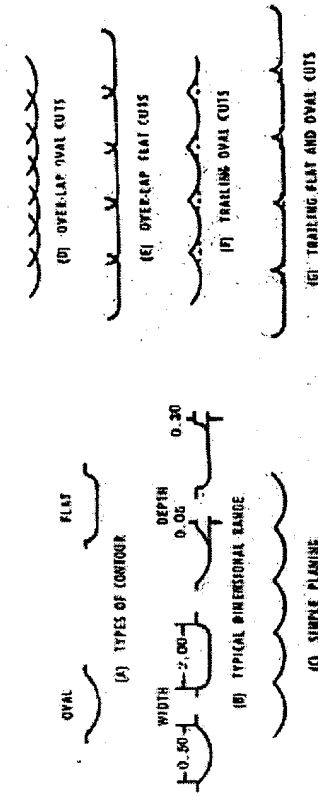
Typical surface configurations possible with the auxiliary oxygen cutting processes.
